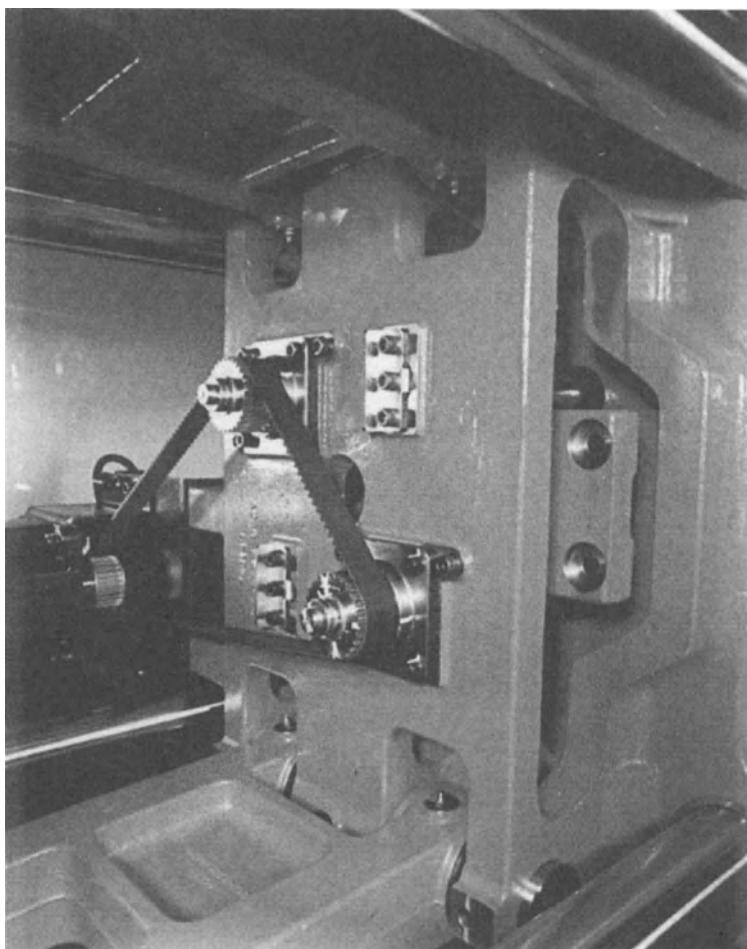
Roboshot IMM servo-driven power section with ball screws.
